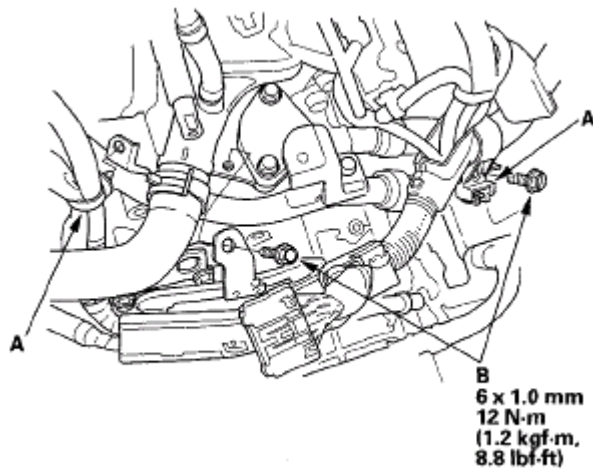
Identifying Harness Clamps And Engine Wire Harness Bracket Mount Bolts
